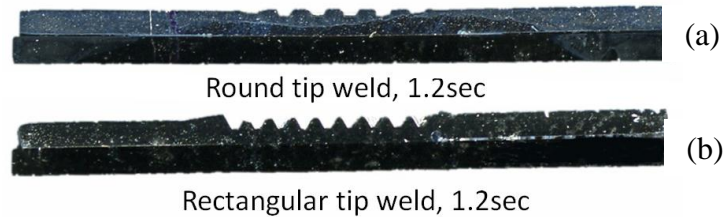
Macrograph of cross-sections of two different type welds, (a) a round tip weld, (b) a rectangular tip weld.
